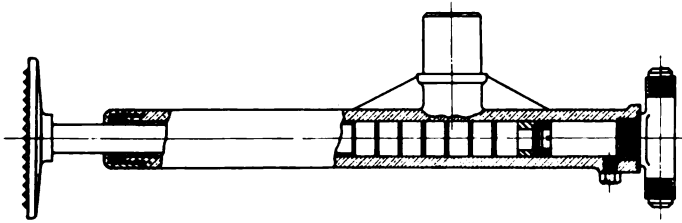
PEDAL USED ON PIERCE-ARROW EQUIPMENT IN CONNECTION WITH A HYDRAULIC BRAKE
